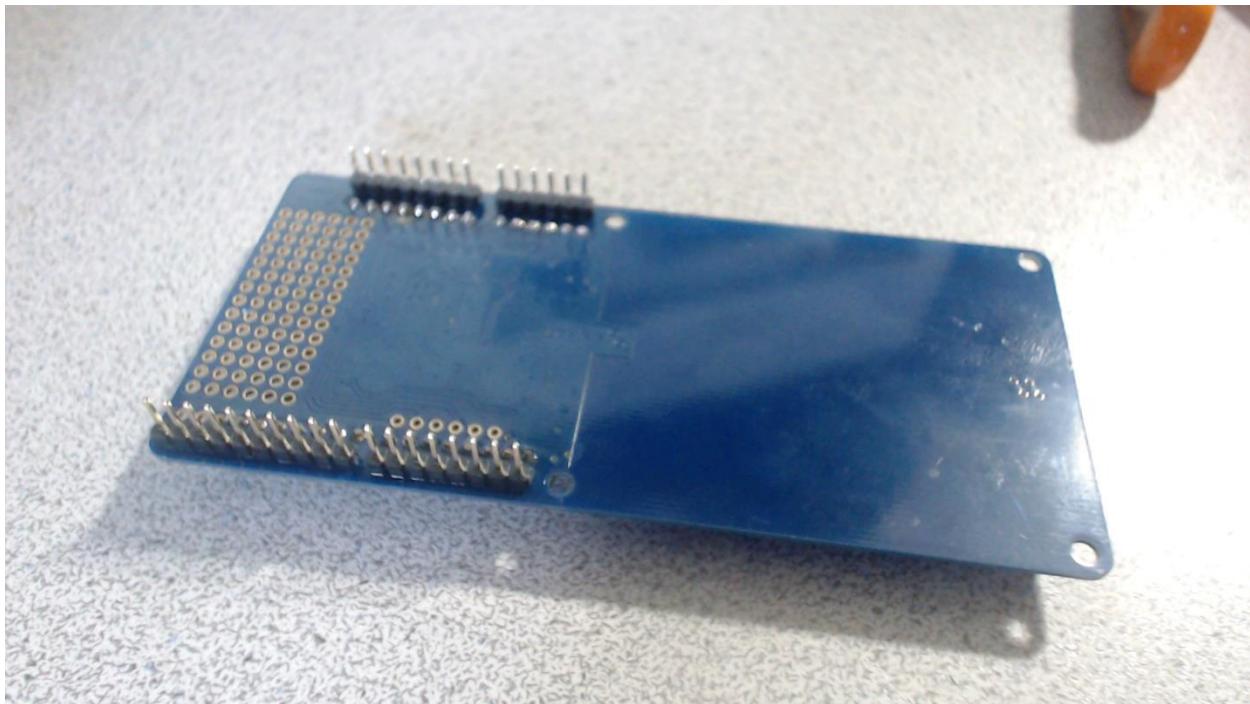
Bottom view of finished Adafruit PN532 shield
